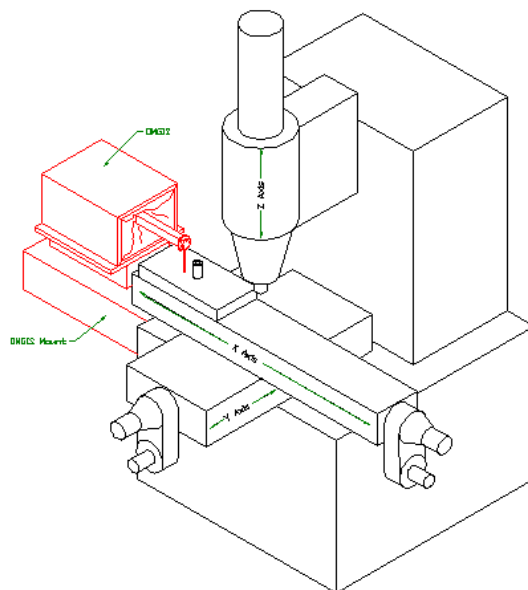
Concept Line drawing of a CUBIT Coordinate Gauging Module on a typical vertical machine tool. Cubit is rigidly attached to machine base. Without removing the workpiece from its fixture and mounting on the machine tool, the stages of the machine tool bring the workpiece to home position for inspection. During the inspection cycle the machine tool is powered down and inactive. Inspection accuracy is derived completely independent of the machine tool and its own slides, controller and software.
